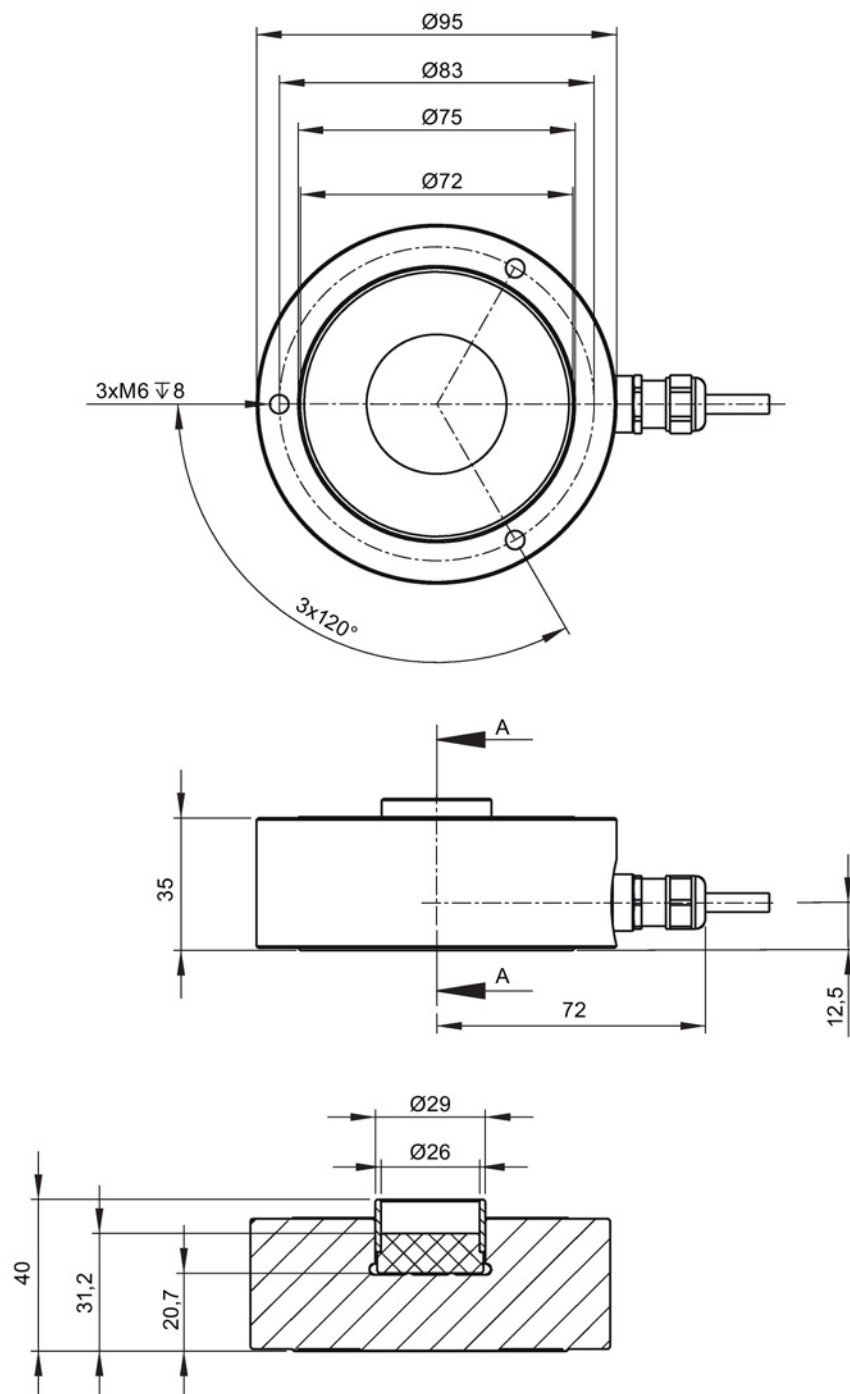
Dimension drawing for SIWAREX WL280 RN-S SA, rated load 10 t
